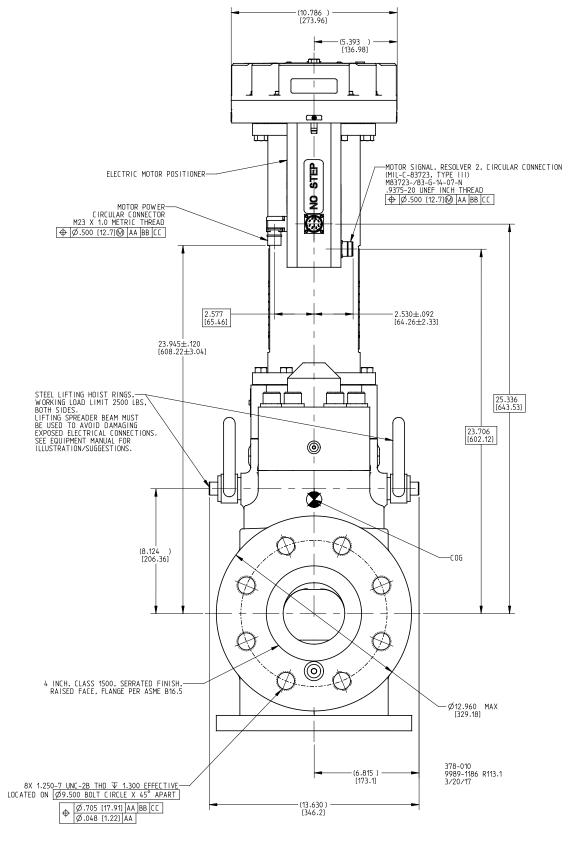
Outline drawing of 4" ELMV-HD and EWMV-HD
